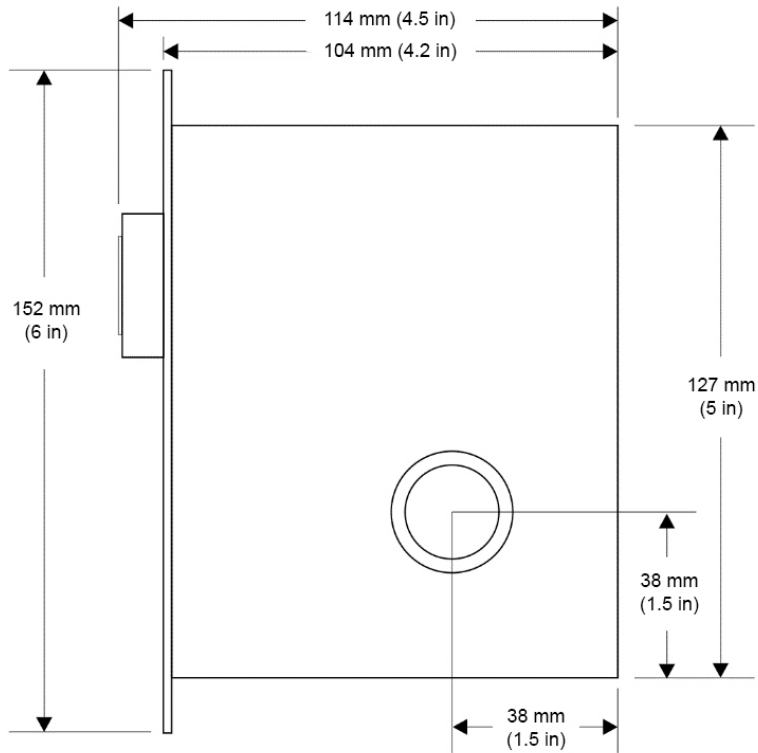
RDP-110C Mounting Dimensions and Knockout Locations (Left Side)
